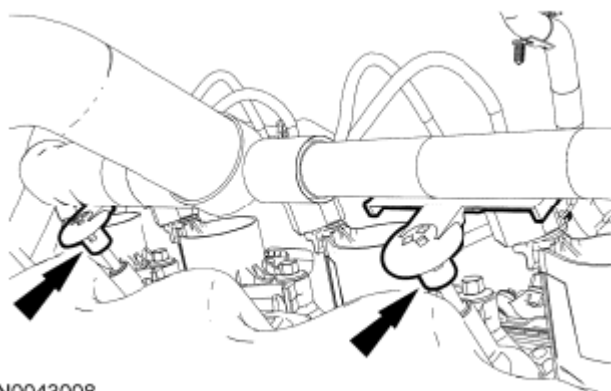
Locating Wiring Harness Retainers And RH Valve Cover Studs
